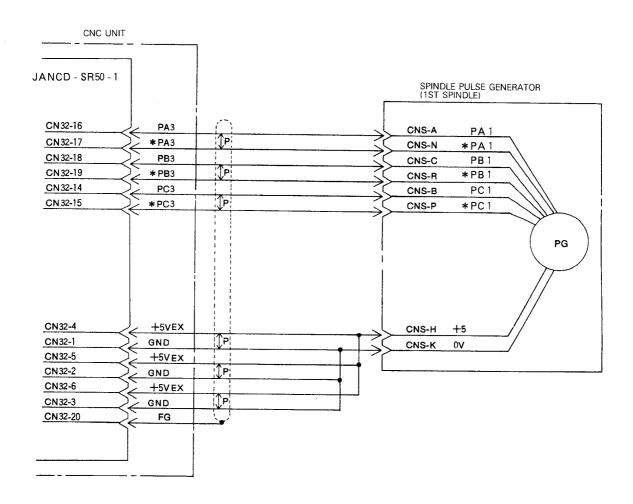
Connection to Motor with Separately Installed PG (1st Spindle)
